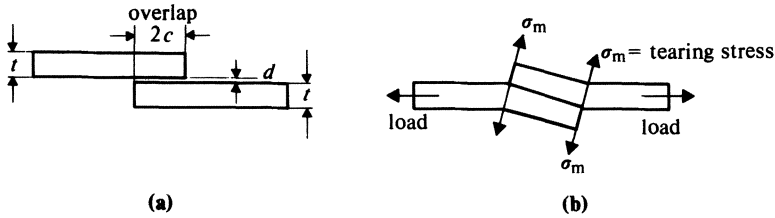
(a) Dimensions of adhesive bonded lap joint; (b) bending of adhesive bonded lap joint in tension and location of maximum tearing stress.
